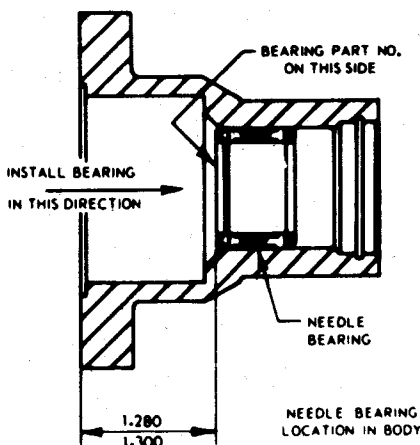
When installing needle bearing in upper cover, press bearing into dimension (inches) shown.
